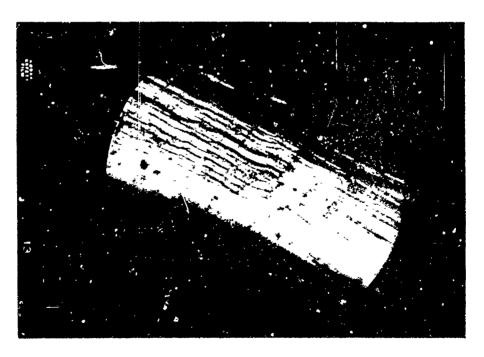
Coating Section Showing Incipient Compressive Bucking Failure and Delaminations.
